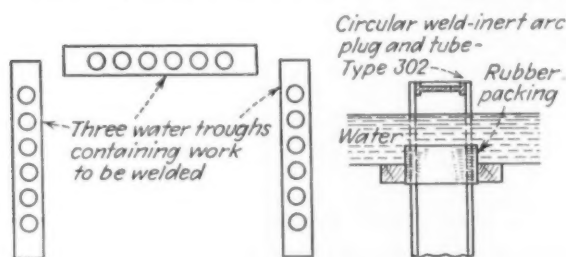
For inert gas welding plugs into tubes, as detailed at right, the setup at left is used. As the operator welds a trough of parts, a helper loads a second and unloads the third.
